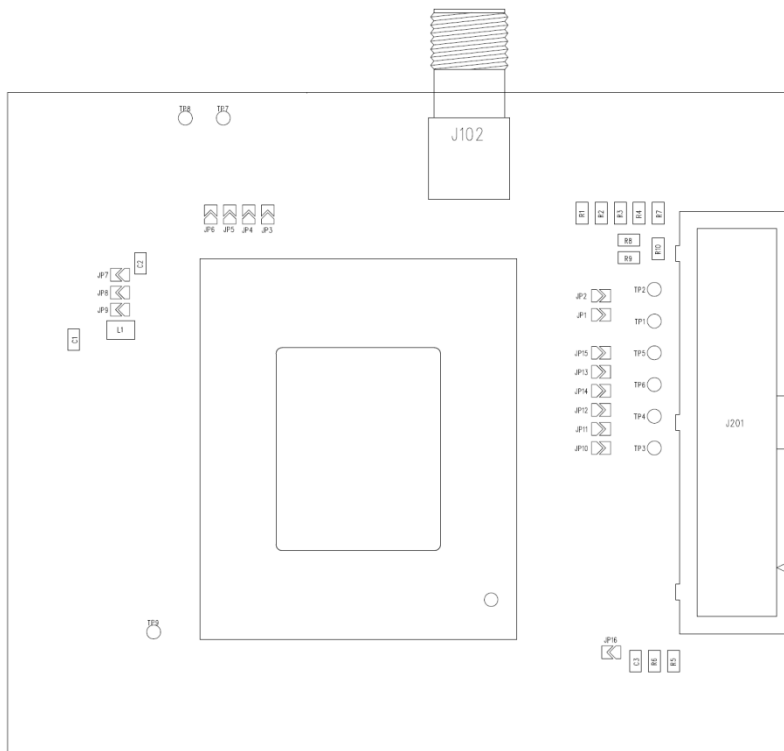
AirPrime SL6087 Socket-Up Board (Top View)
